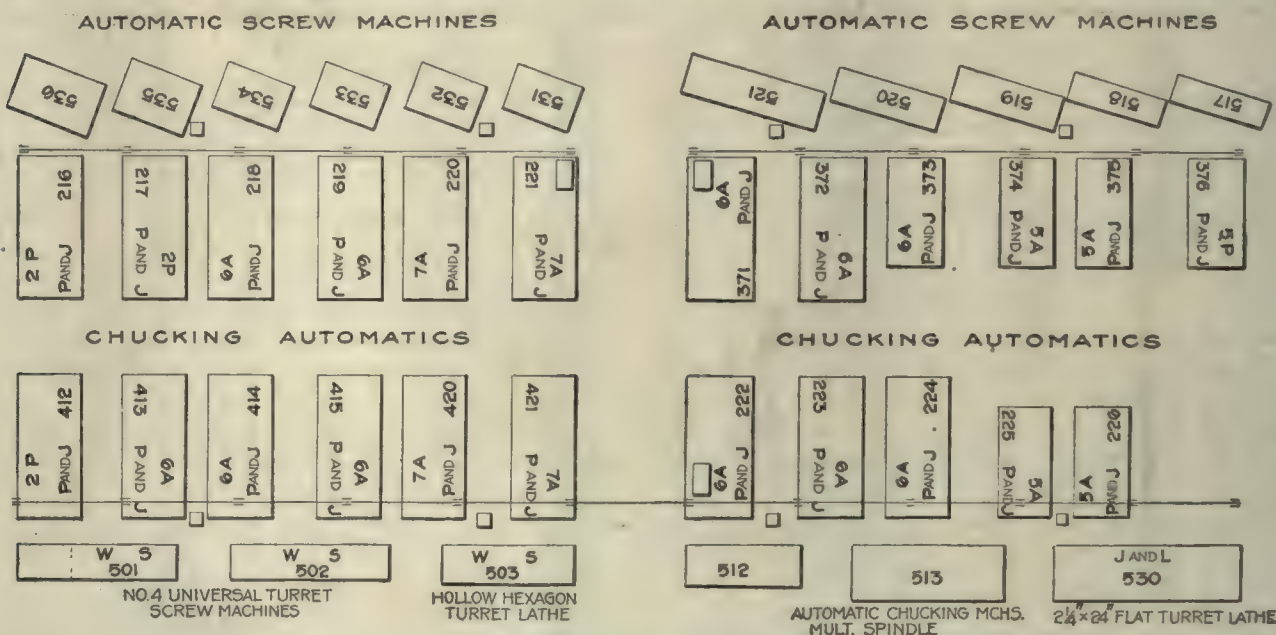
FLOOR PLAN OF SHOP FOR USE OF PLANNING DEPARTMENT
